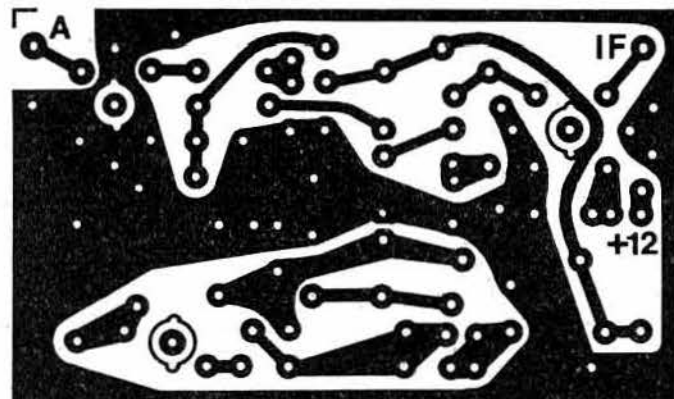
PCB and component layout for the VK3ABP 144MHz converter
